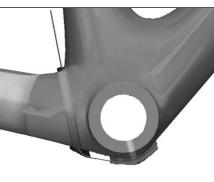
Front derailleur inner-wire passing through bottom bracket inner-wire guide tube
